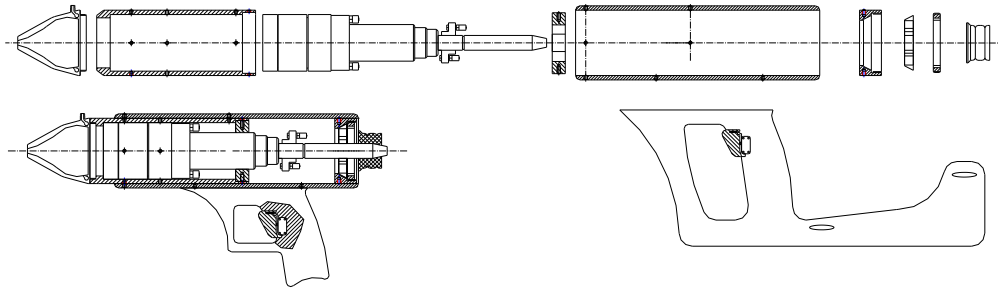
Assembly diagram of a layout of a handheld laser tool with a modernized handle to facilitate welding due to better holding of the welding tool.
